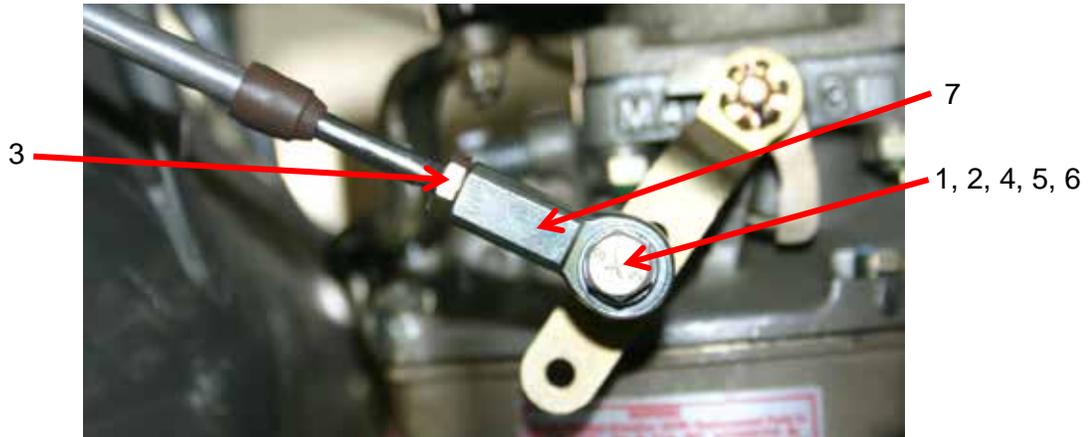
(CCK/CCX-1865) Attachment of Throttle to Engine Mount Tube Bracket
